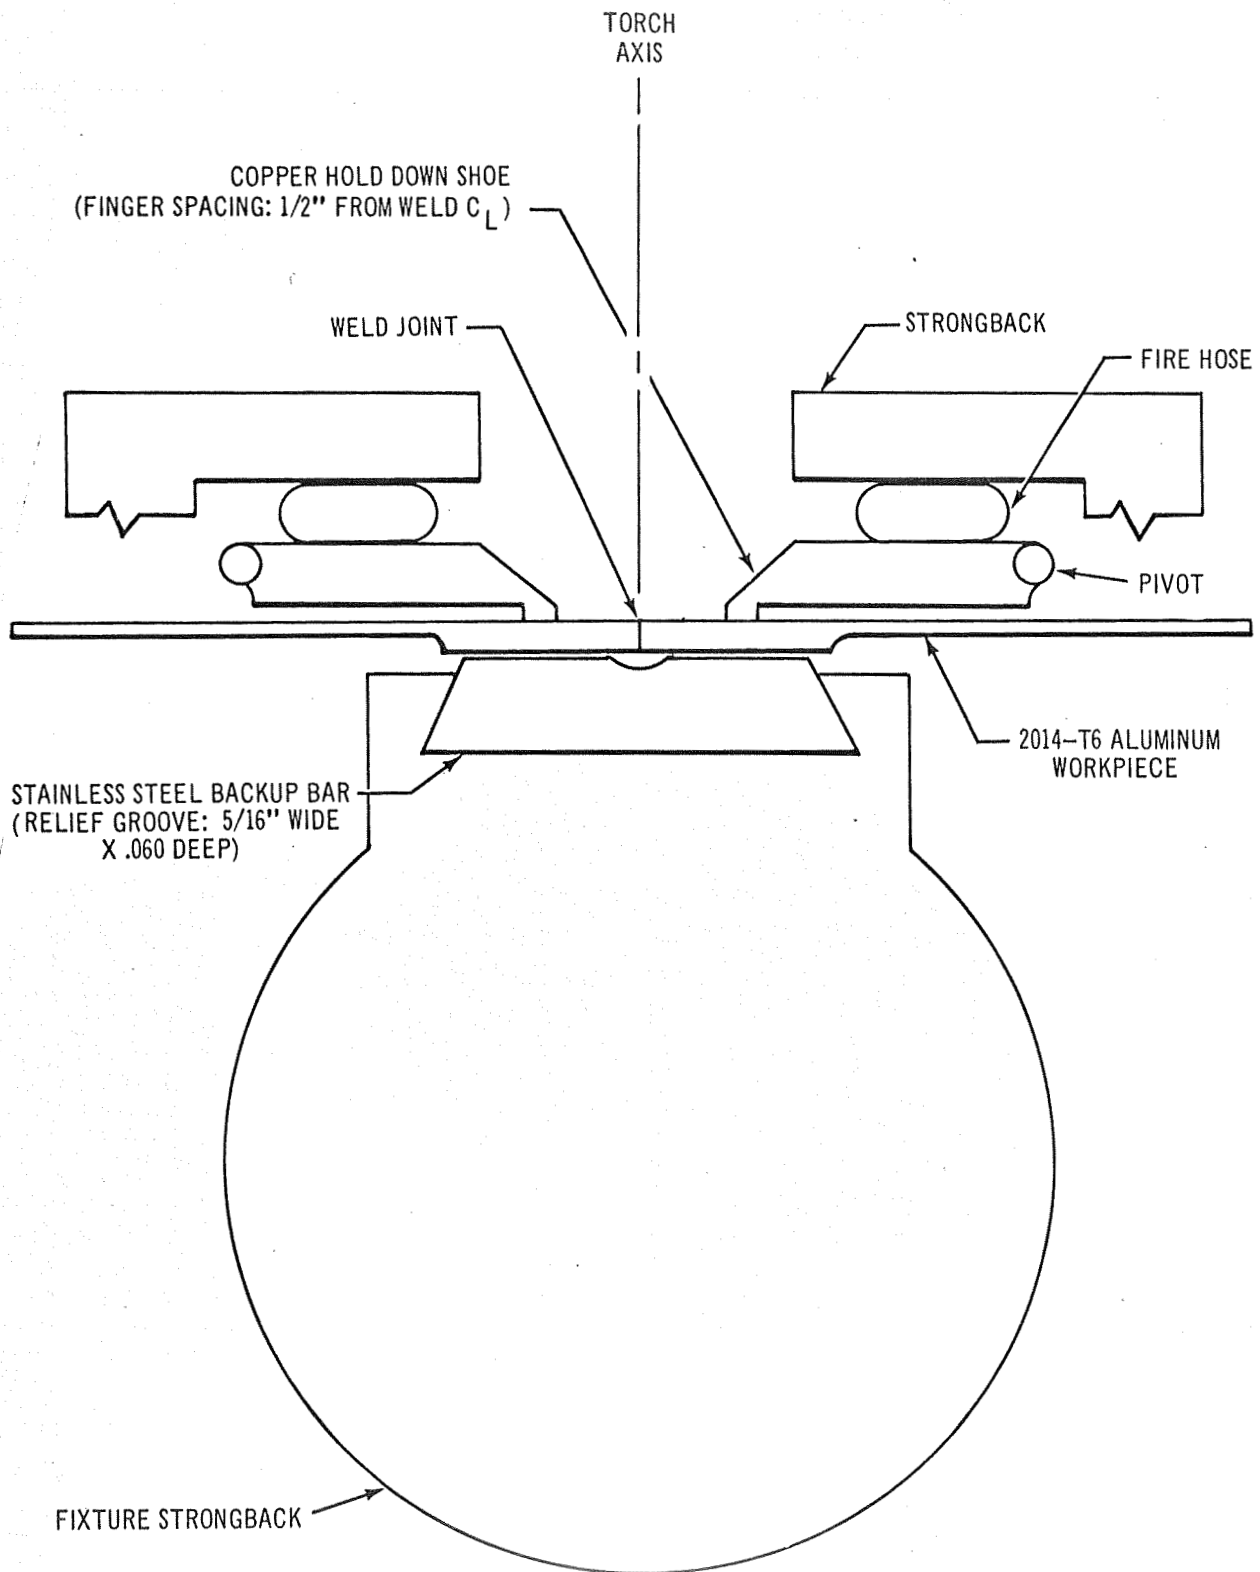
Tooling and Joint Details for Laboratory Welds Used in Weld Land Tests.
